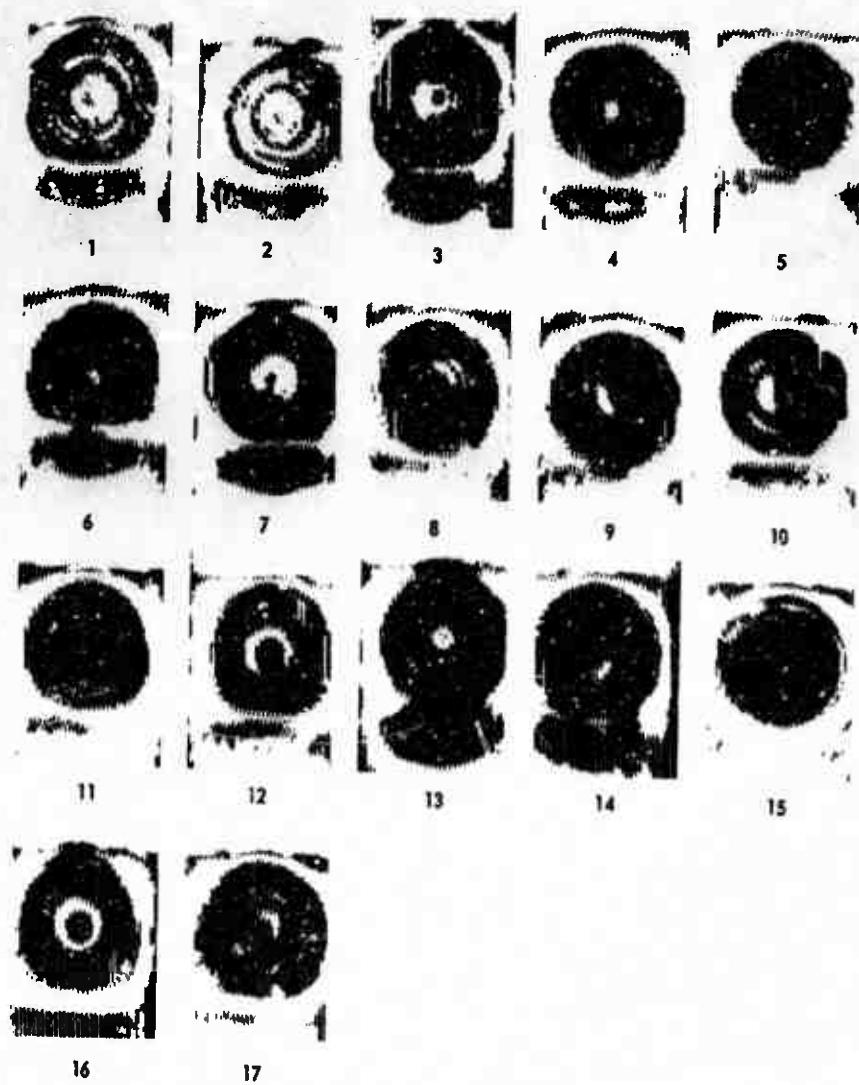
C-Scan Record of Series 4 Welds.
